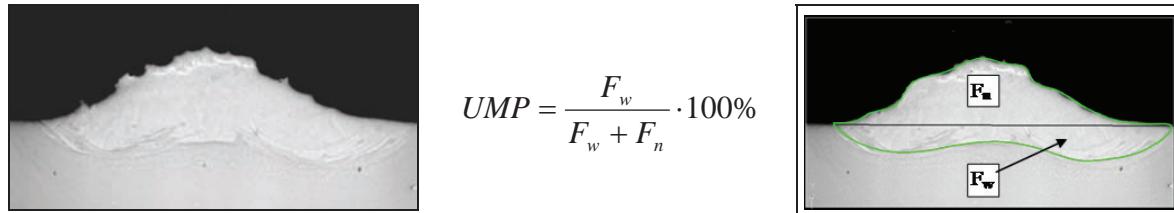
The manner of calculating the base material percentage (UMP) in a padding weld: F_n - the surface area of the excess metal of the padding weld; F_w - the surface area of the padding weld fusion
